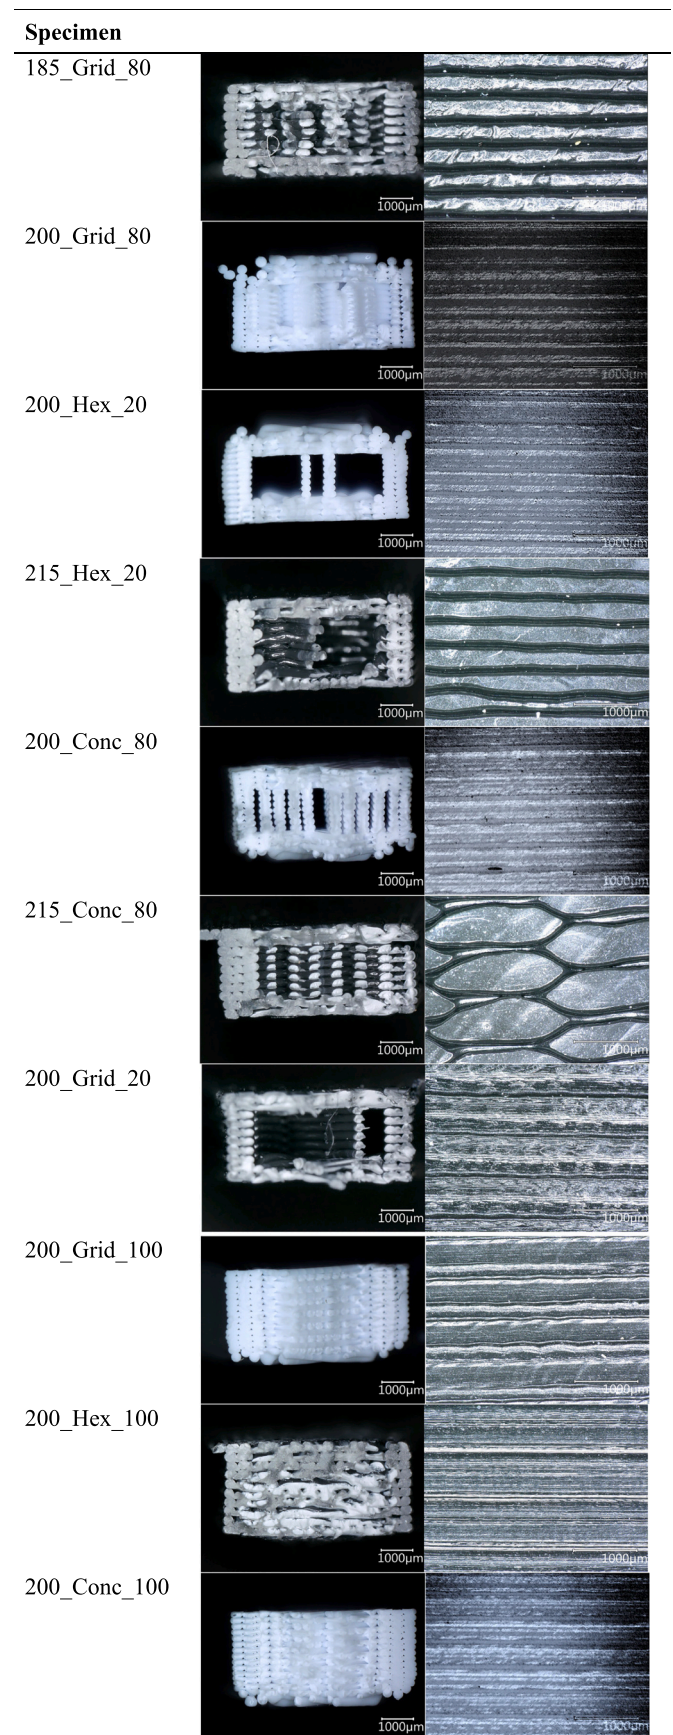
Fracture surfaces and specimen surfaces of tensile test specimens.
